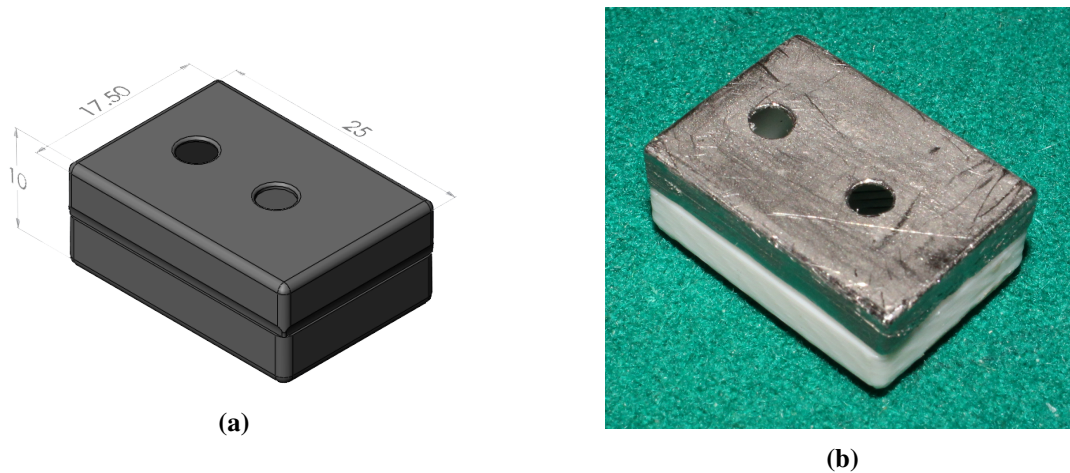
Casing used for test II. (a) CAD model of the Casing. Dimensions in millimeters. (b) 3D printed model.
